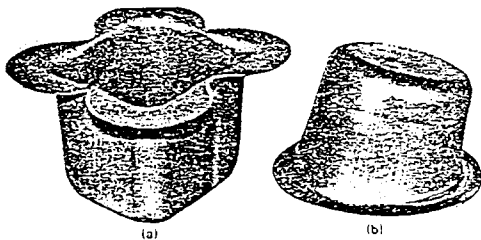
Formed products : (a) using a Teflon-coated steel sheet; (b) a car part where the die face is not flat.
